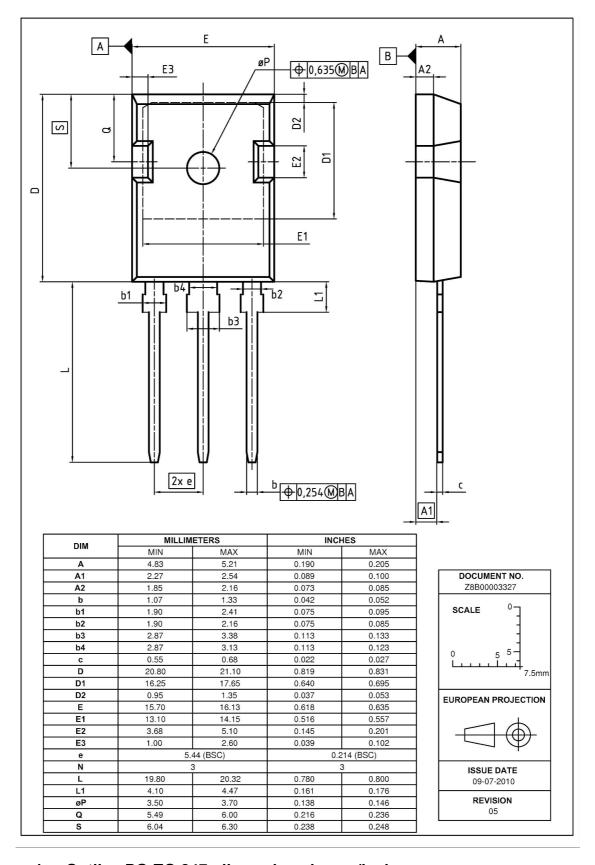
Outline PG-TO 247, dimensions in mm/inches
